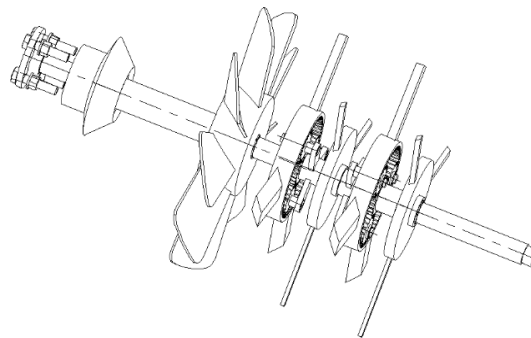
Leaf shredding device with four-level counter-rotating blades based on a fixed shaft gear system.
